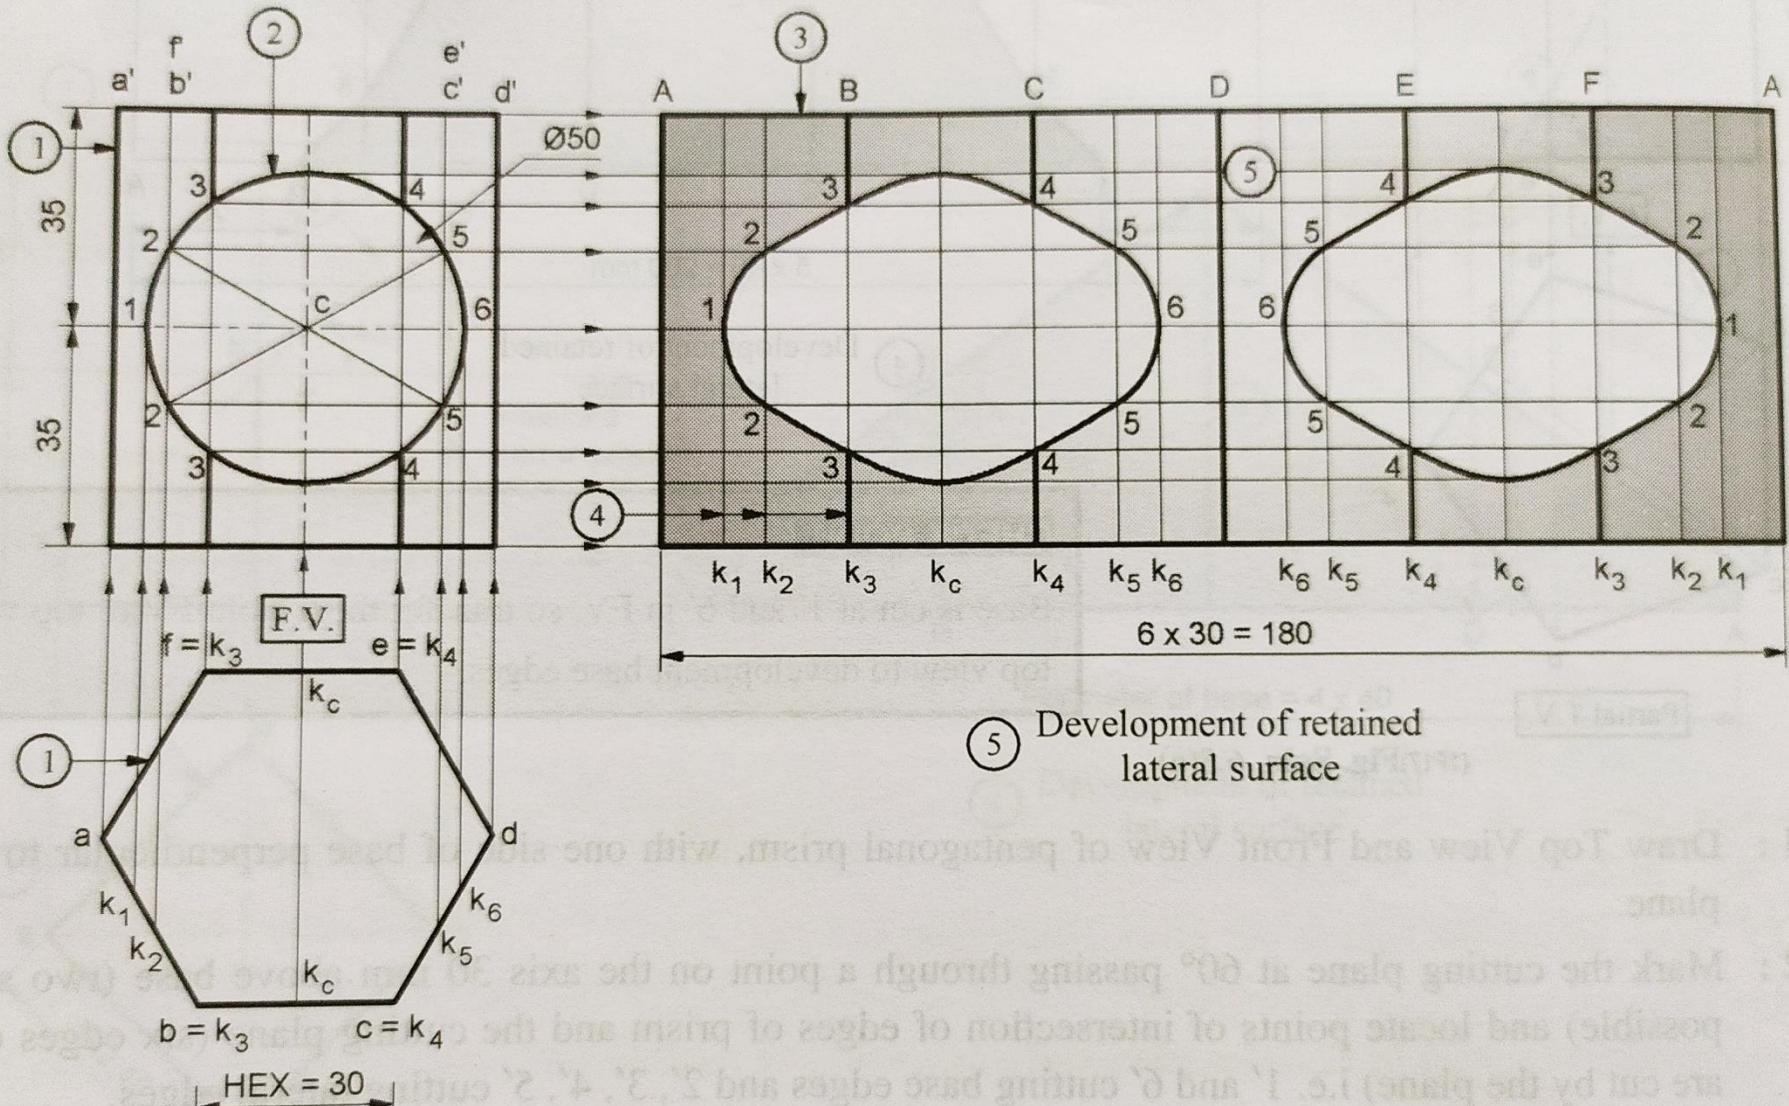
shows a regular hexagonal prism having a circular hole drilled through it. Draw development of lateral surface of cylinder.
